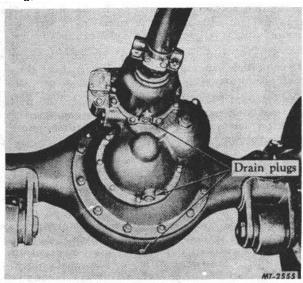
Location of Lubricant Drain Plugs in Forward Rear Axle.
